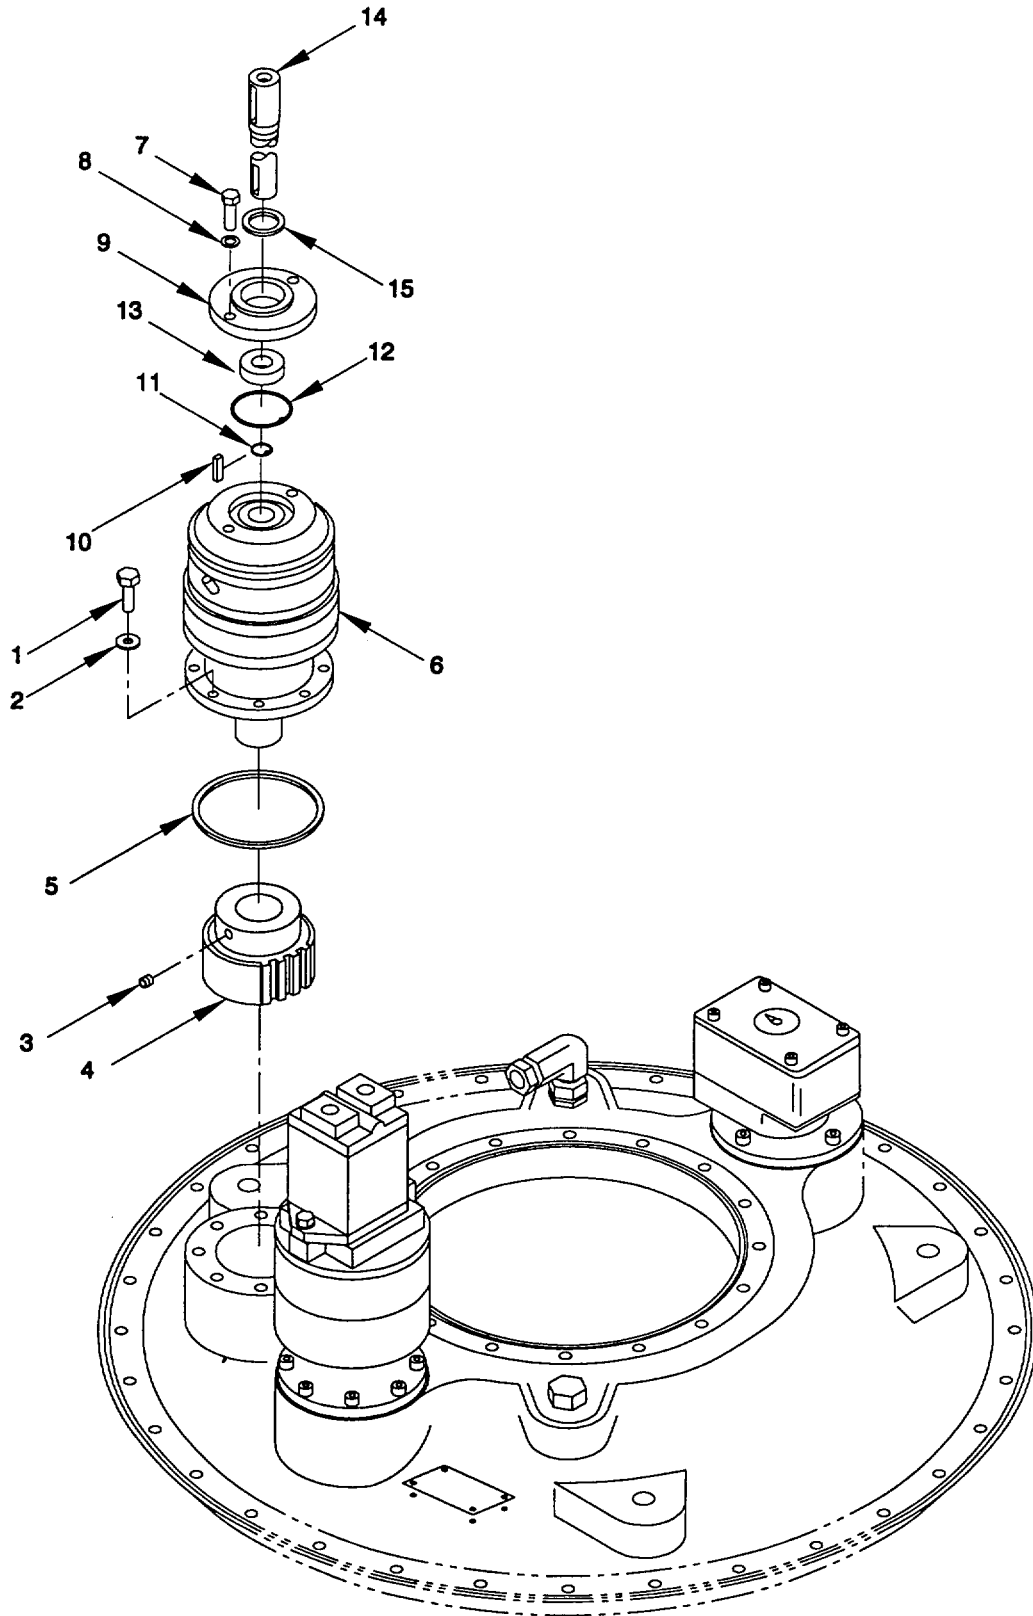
Planetary Gearing, Emergency Steering, Pump-Jet, Remove/Install.
